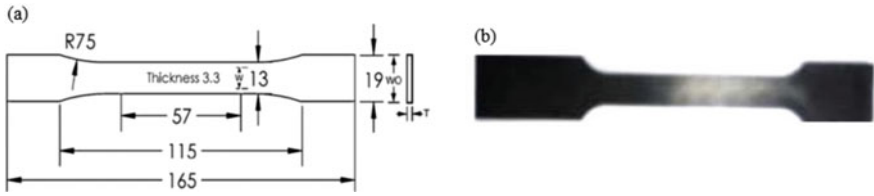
a ASTM D3039 dimension. b 3D printed test specimen
